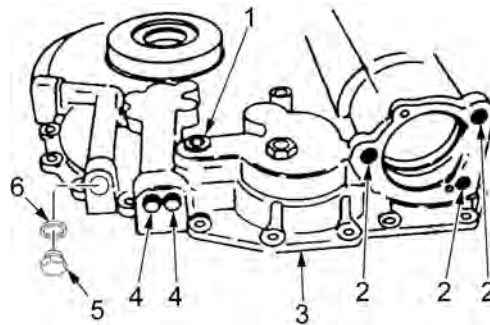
Pipe Plugs, Inserts, and O-Rings, Left Cover Assembly, Installation, View 1.
